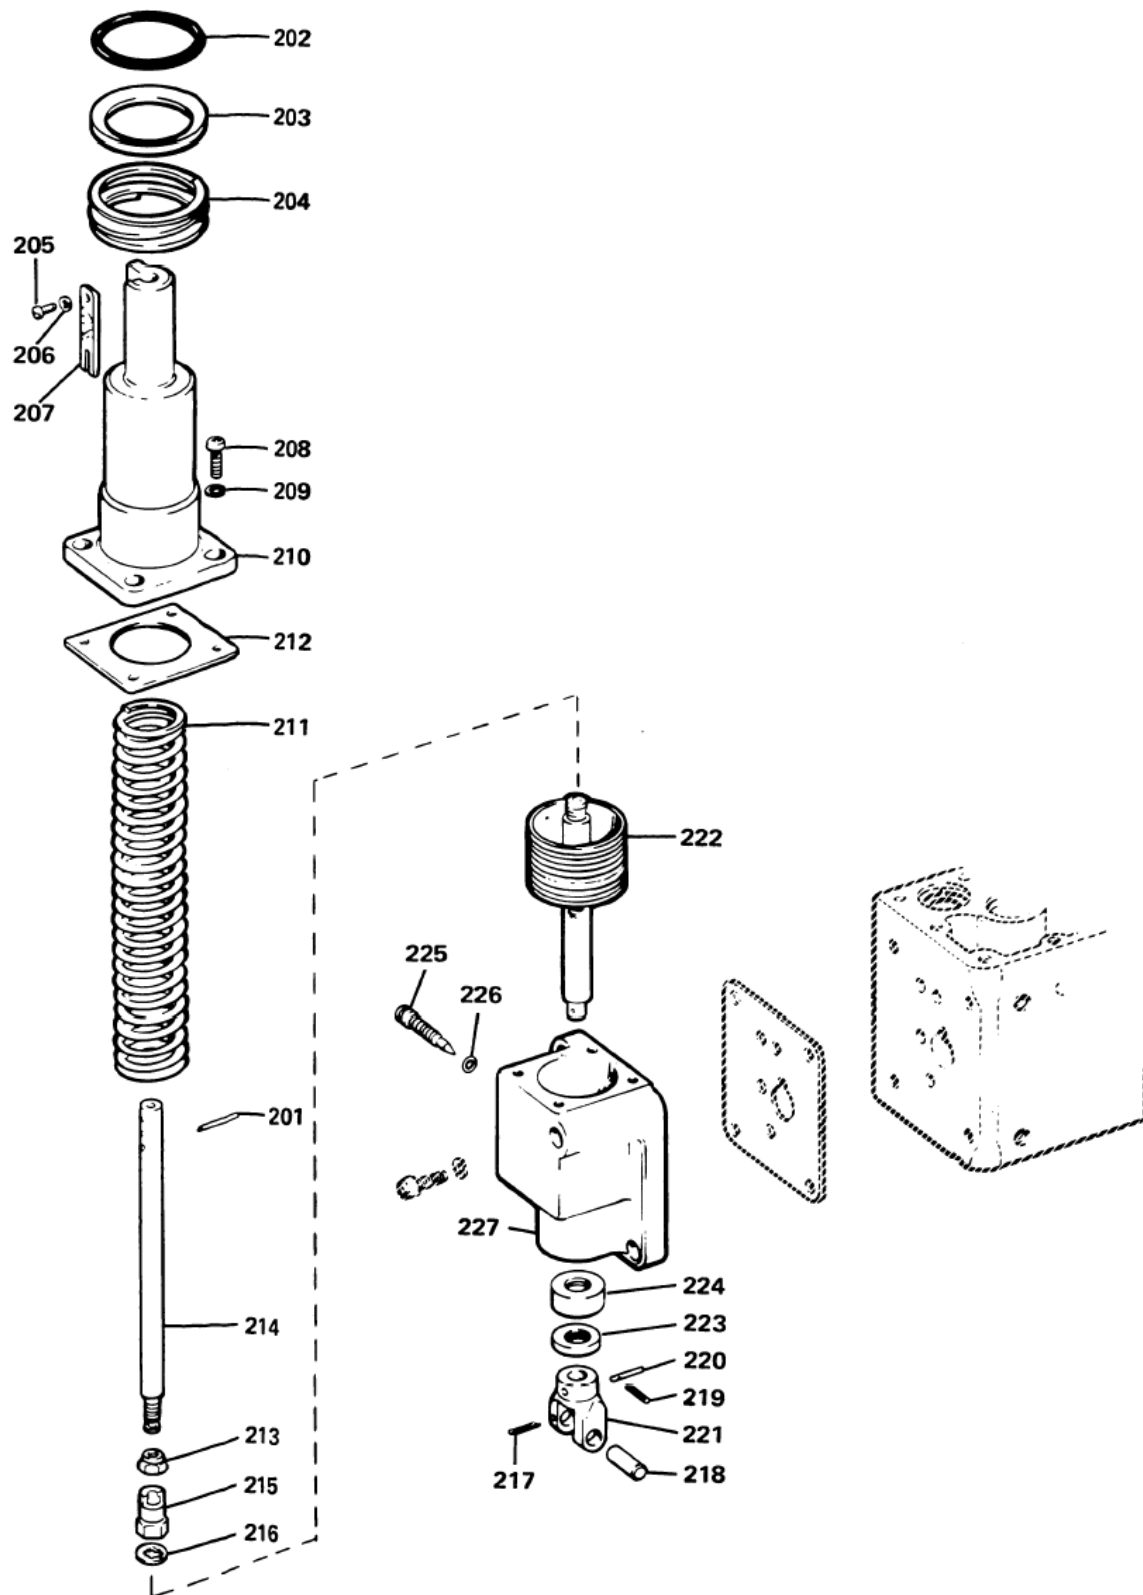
Exploded View of Spring-Loaded Power Cylinder
